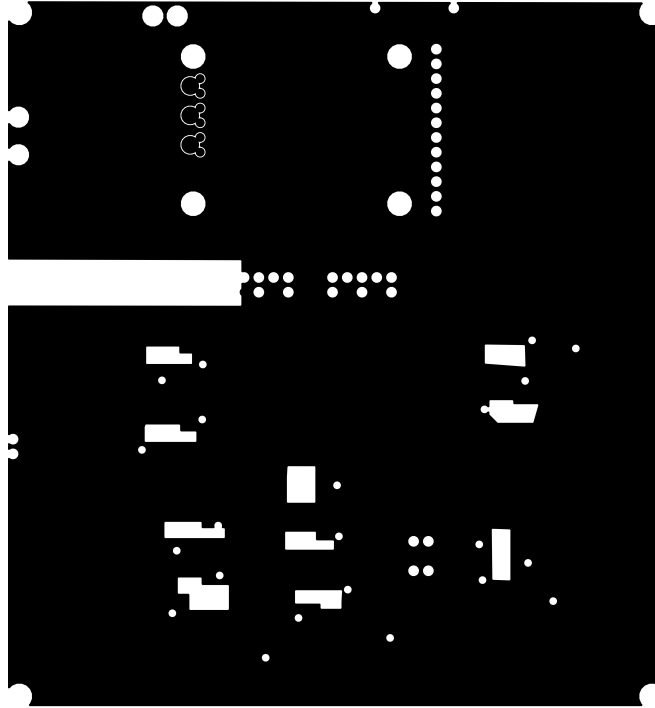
Prototype PCB Ground Plane (Third) Layer - Copper Layer View
